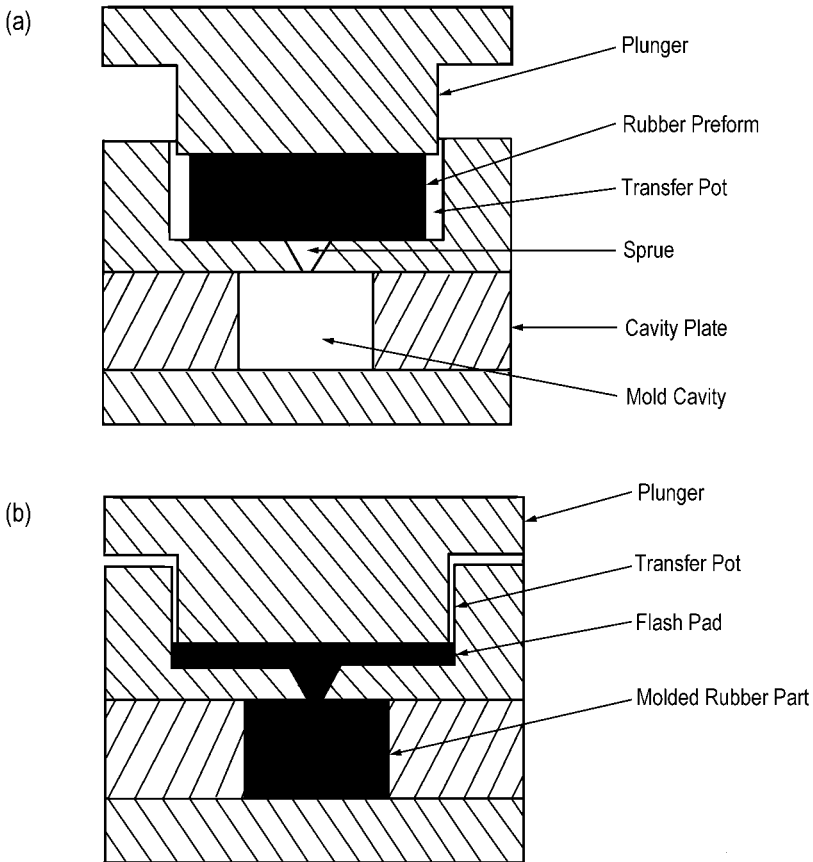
Transfer mold showing (a) preform in transfer pot before closing mold, and (b) after closing mold
